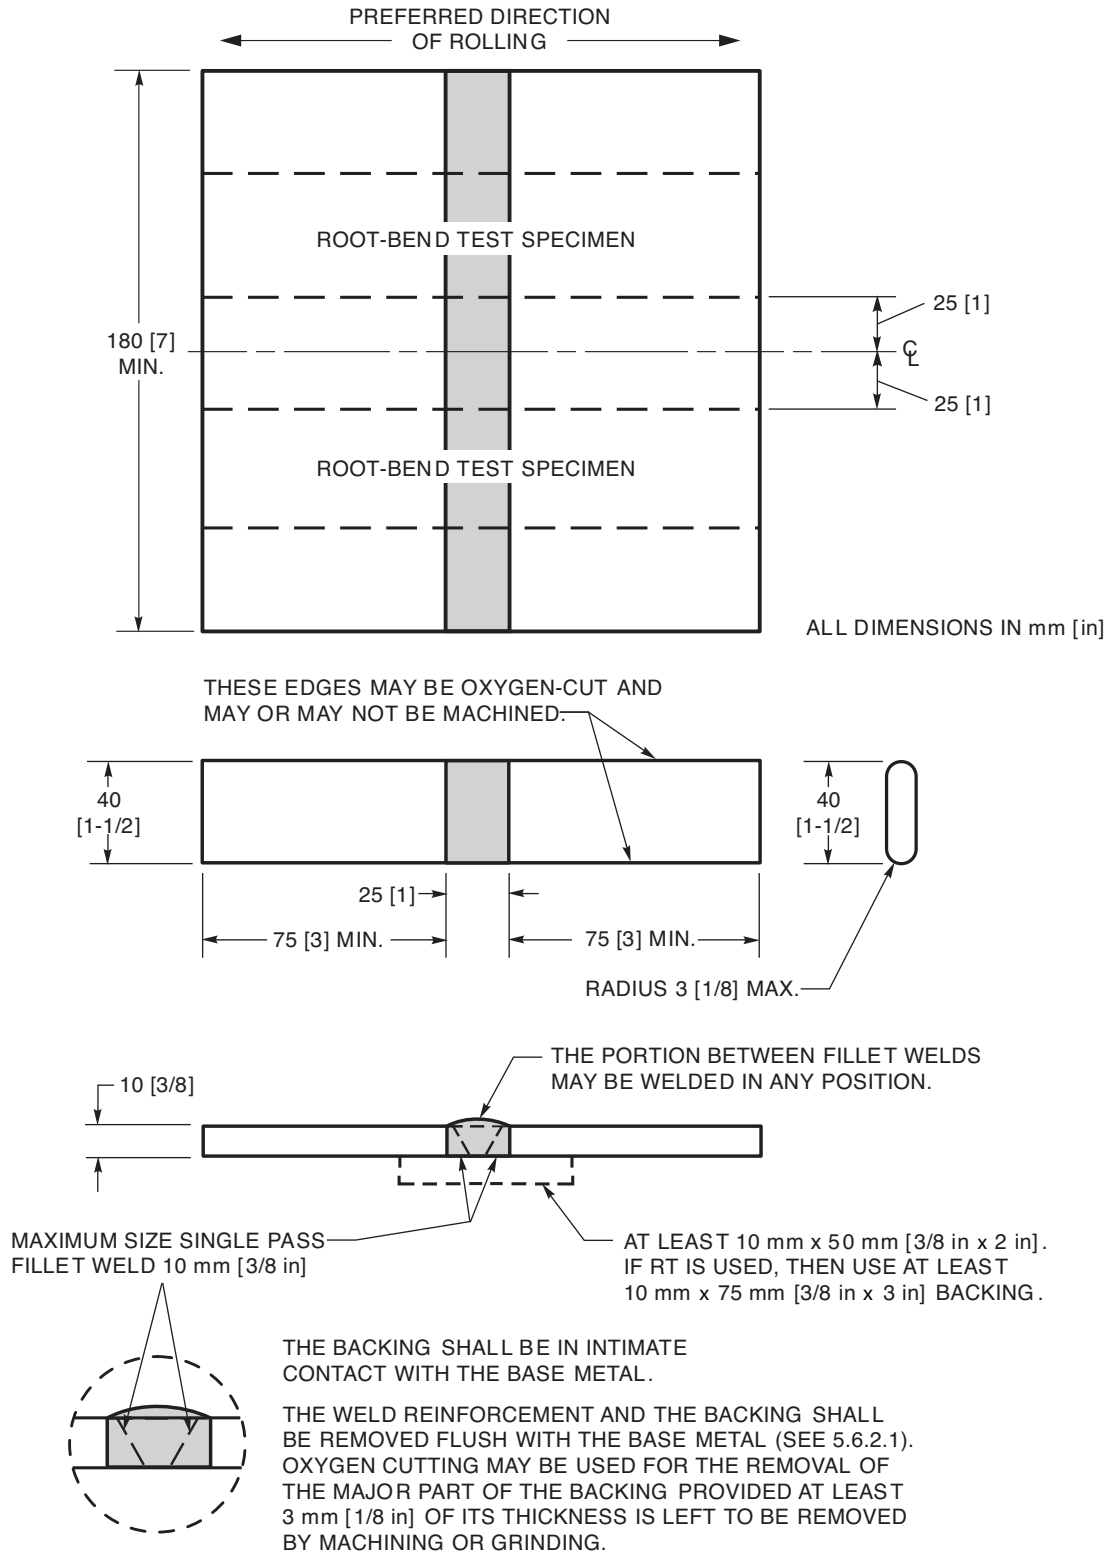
Fillet Weld Root-Bend Test Plate—Welder Qualification—Option 2 (see 7.23.1.4)
